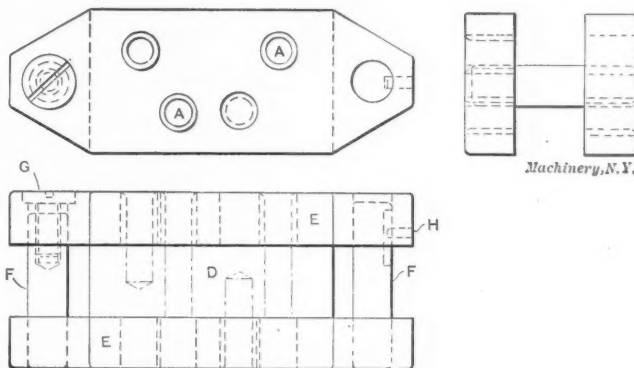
Simplest Form of Closed Jig for Drilling Work in Fig. 83.
